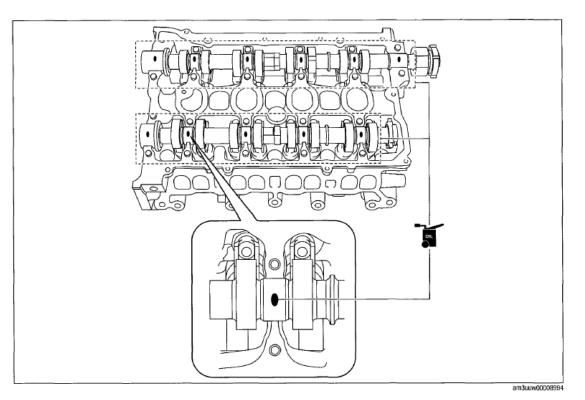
Identifying Gear Oil Applying Areas To Center Area Of Camshaft Journal
